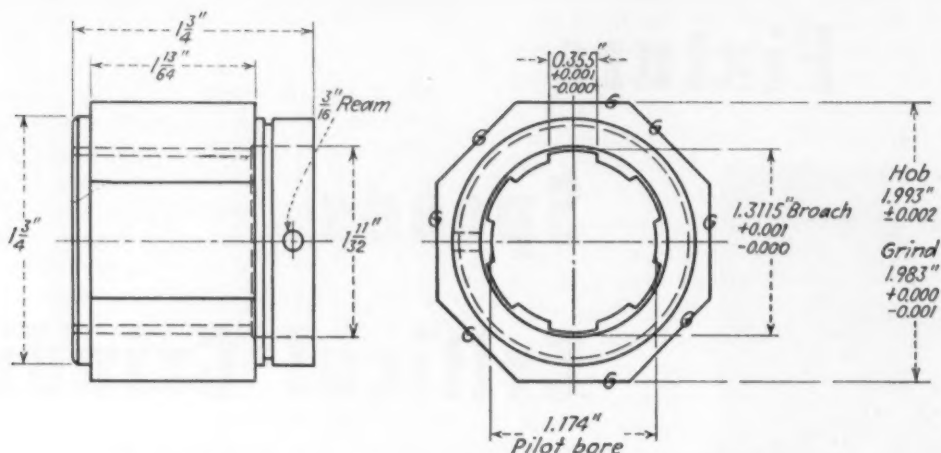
This cam must be ground with extreme accuracy on all eight sides. To do this grinding, a fixture was developed that positioned the cam under the grinding wheel quickly and accurately.
